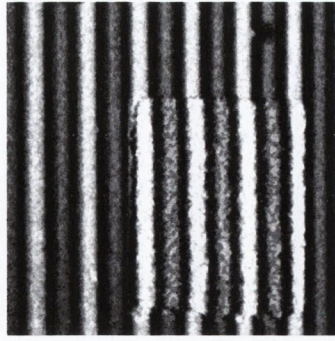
Solder Paste deposit of the Red Channel Image.
